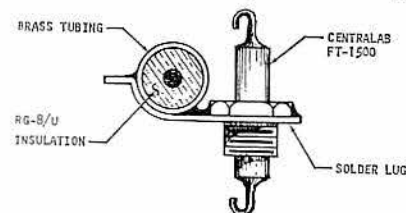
Solder lug is shaped to fit one-quarter way around the brass tubing.
